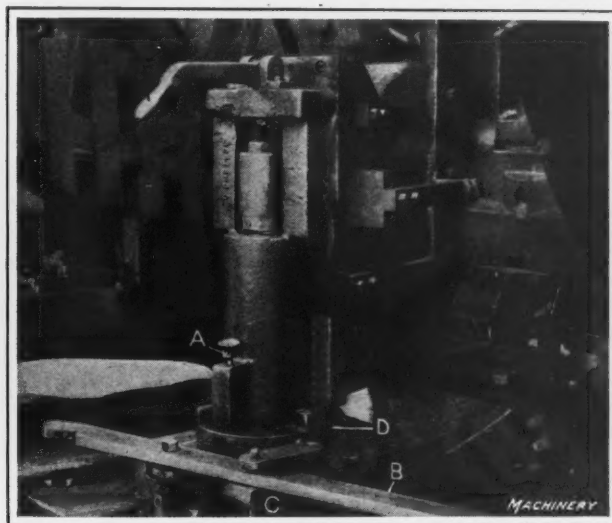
Fixture used in locating the Shells during Operation of trimming the Ends
